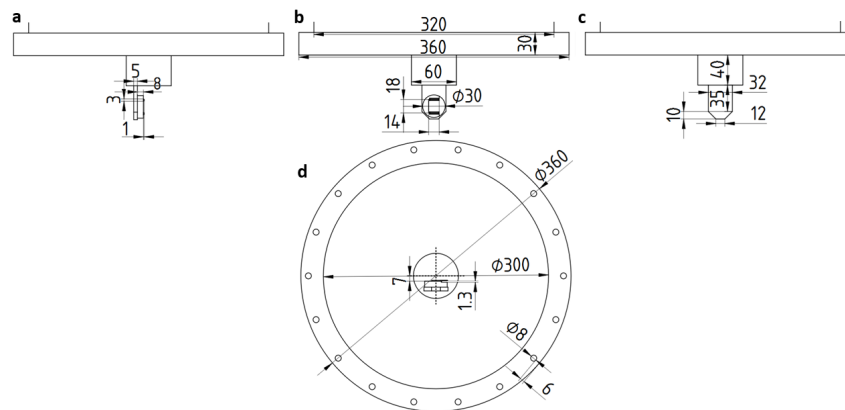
Technical drawing depicting the manipulator viewed from the a) left, b) front, c) left, and d) bottom. Units of length are in millimeters.
